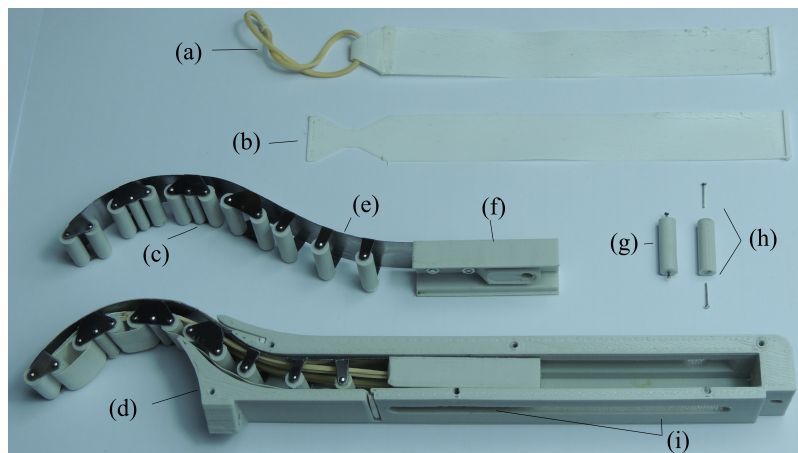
A single finger module in various states of assembly. The labeled parts as are follows: (a) Belt with rubberband (b) Unwelded belt (c) Finger with guide rollers (d) Complete finger module with wrist part and belts mounted (e) Pre-shaped backbone (f) Finger sliding block (g) Assembled roller (h) Disassembled roller and pin axles (i) Slot for actuator connection.
